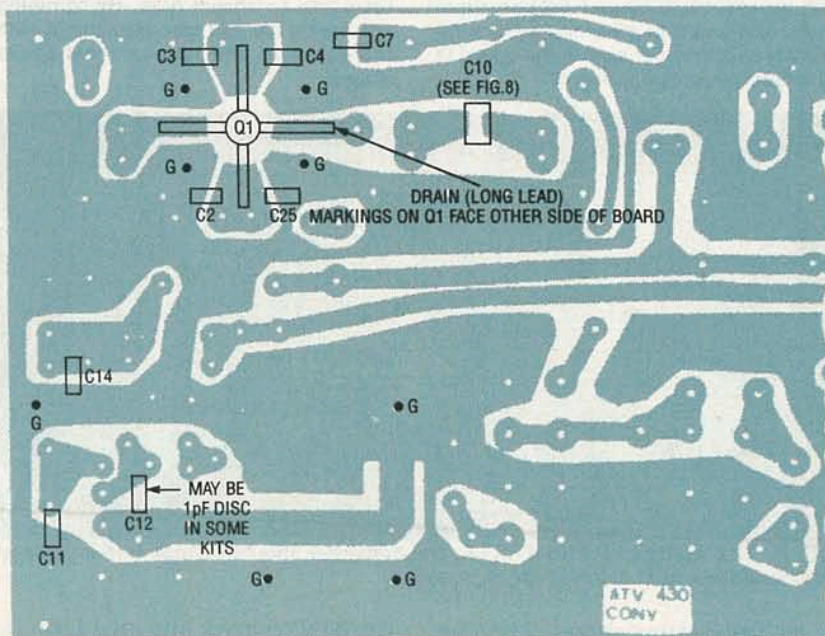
ALL CHIP CAPACITORS, C10 (see Fig. 8), and Q1 mount on the solder side of the board. The markings on Q1 face the component side of the board.
